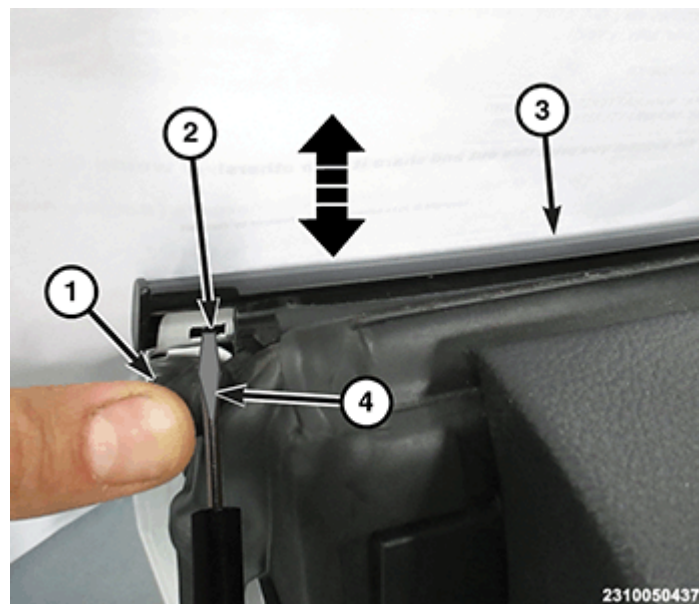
Door Seal, Tab, Outer Belt Molding & Flat Bladed Tool
